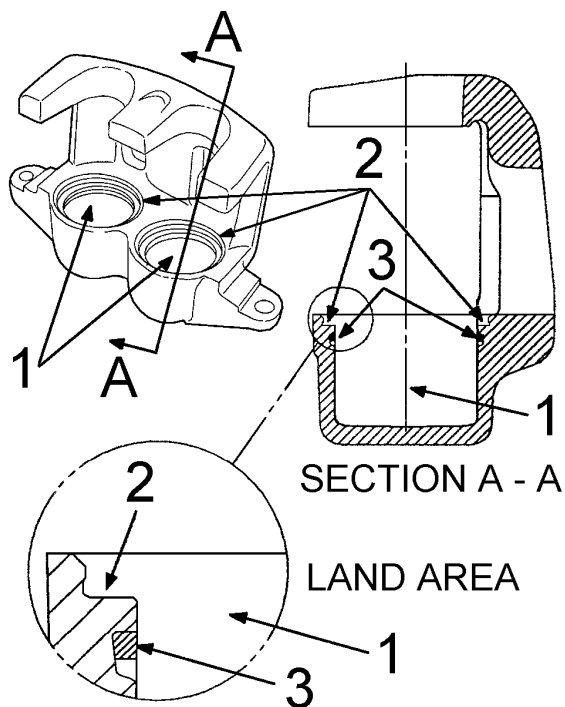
Apply Batco Grease To Caliper Bore Piston Boot Groove between Piston Seal and Piston Boot Groove Land Area
